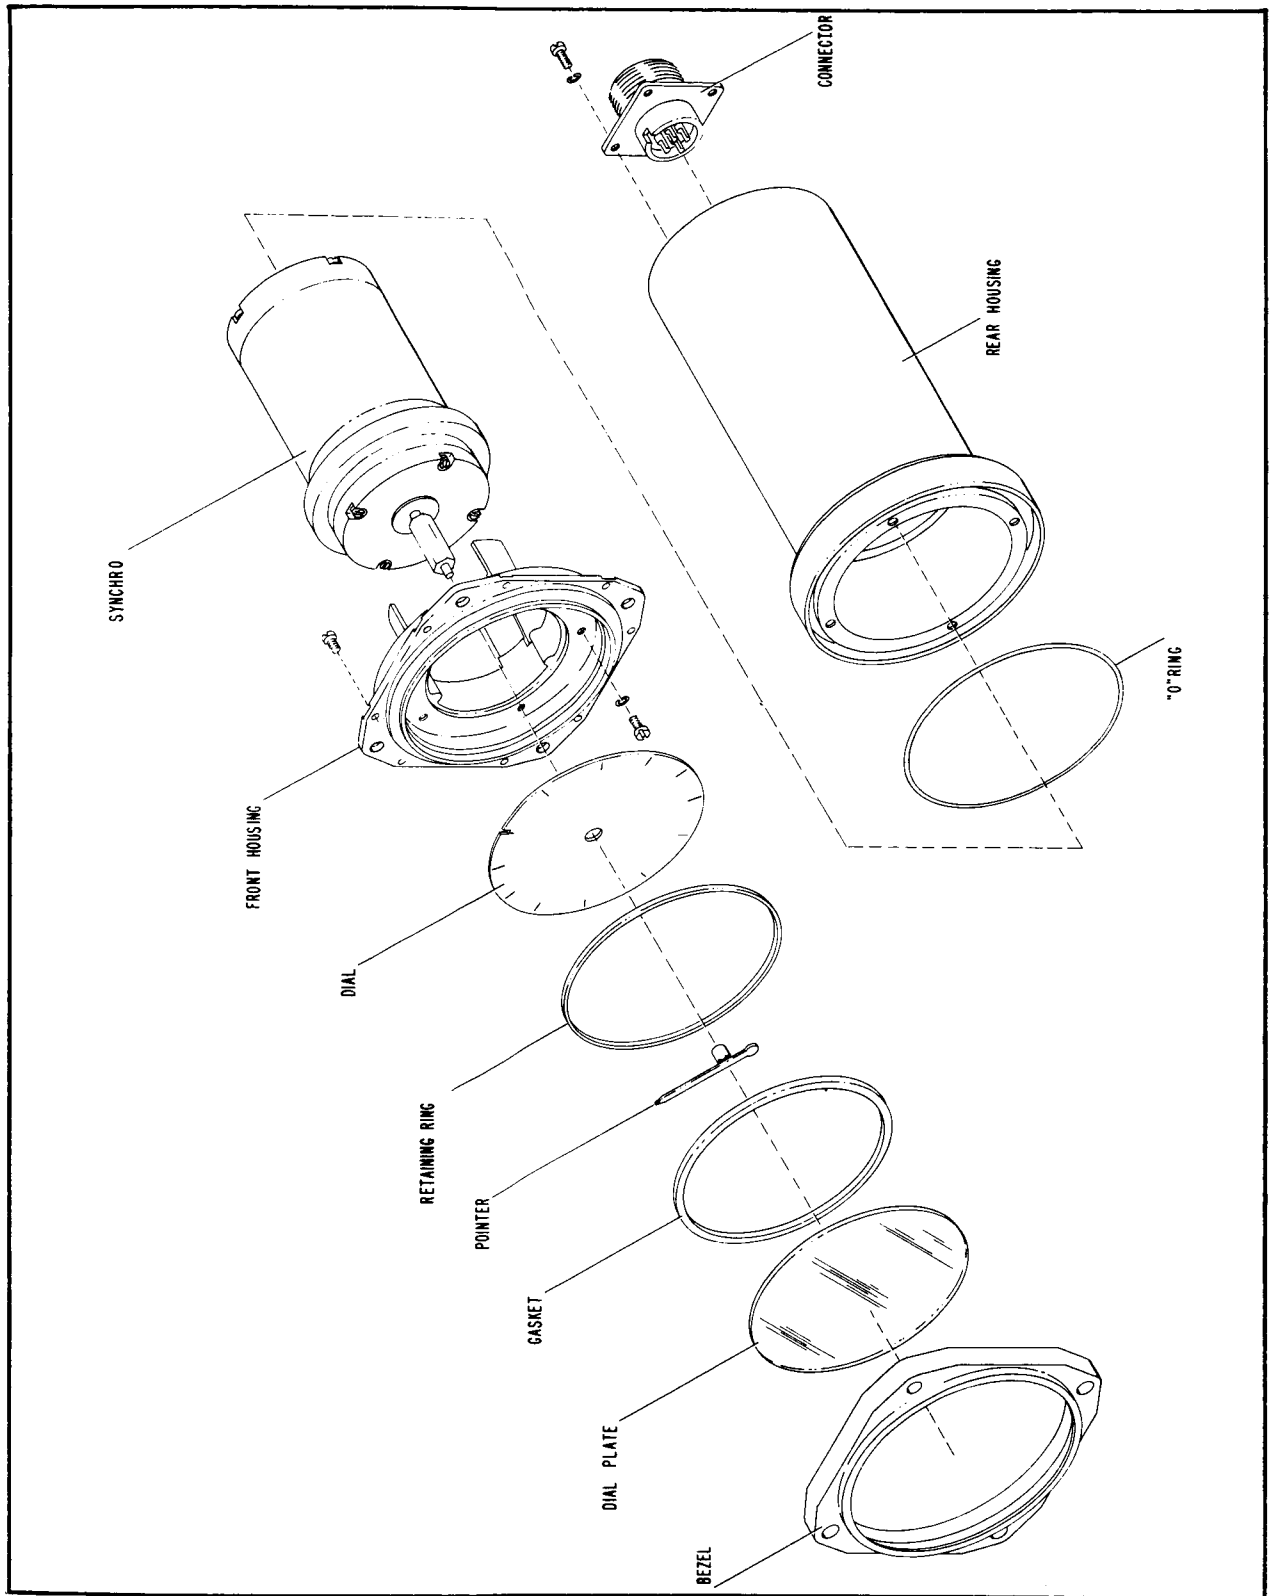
Radar Display Panel Synchro Receiver, Exploded View
